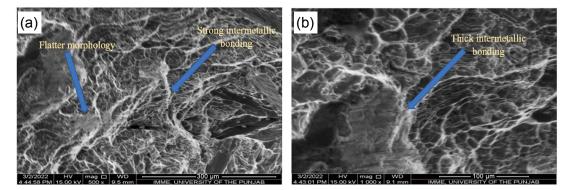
Fracture surface SEM images of specimens manufactured 90 MPa squeeze pressure, 800 °C melt temperature, and 250 °C die temperature showing brittle fracture (a) and thick intermetallic bonding between Al7075 and Cu inserts (b)
